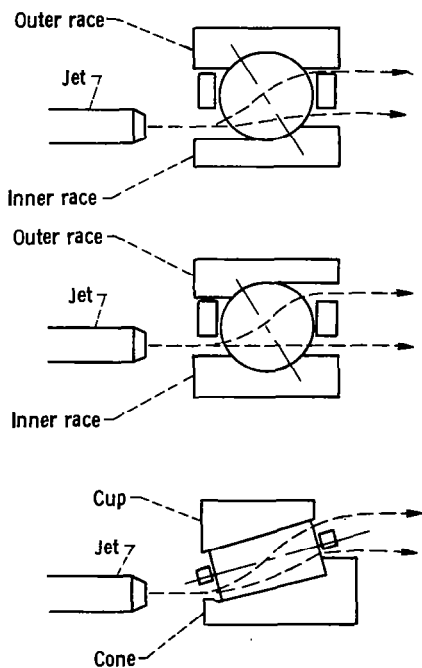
Placement of jets for ball bearings with relieved rings and tapered-roller bearings.
